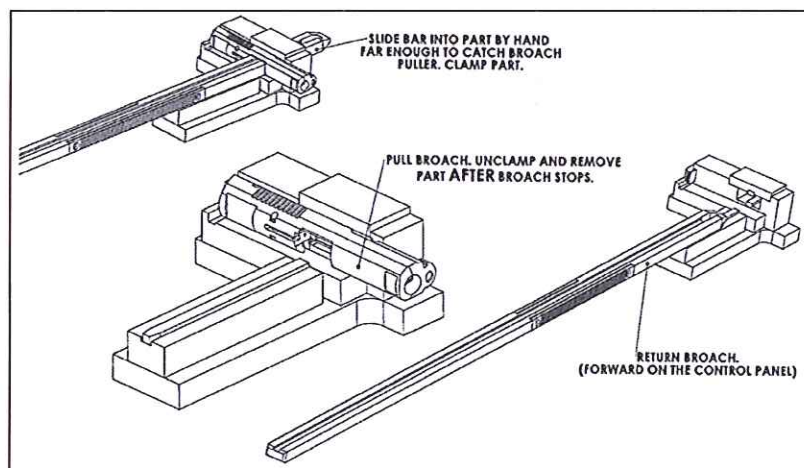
Sliding broach cutter through slide, removing slide, returning broach to original position
